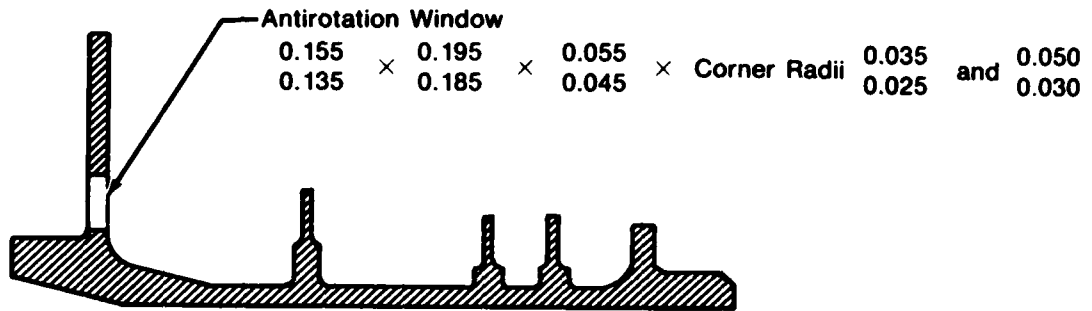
7-8 Compressor Spacer (P/N 403972)
